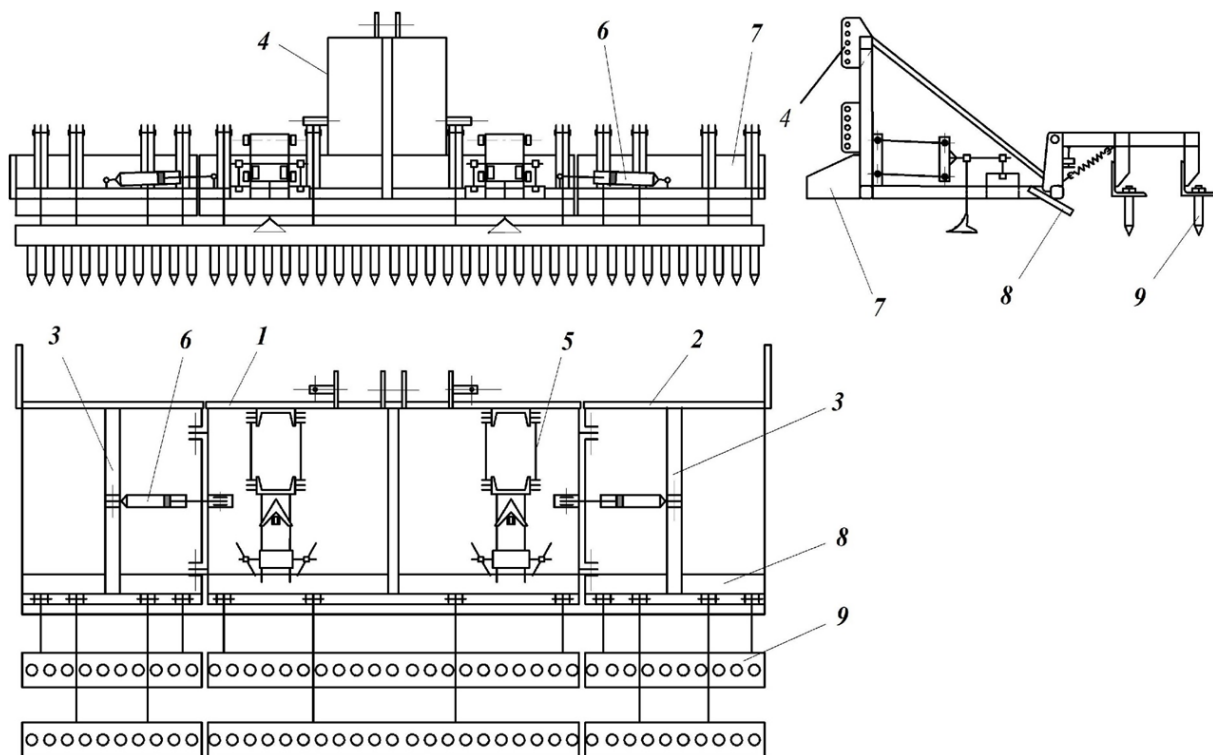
Constructive scheme of a grinding wheel-leveler equipped with track softeners and a device: 1-central section; 2-right side section; 3-left side section; 4-suspension device; 5-trace softener; 6-hydraulic cylinder; 7-straightener; 8-compressor; 9-device that creates a soft soil layer on the surface of the field
